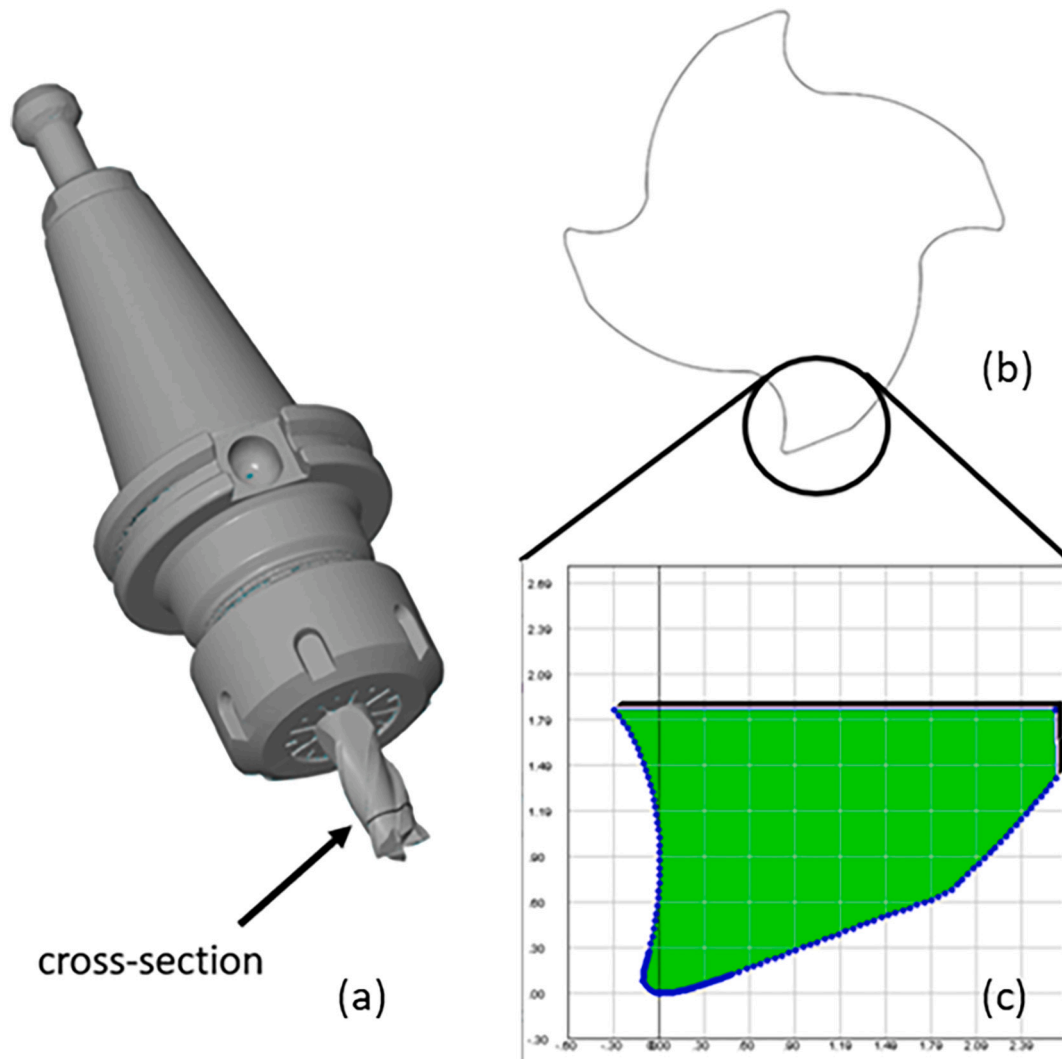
(a) Tool scan using GOM ATOS Q scanner. (b) Tool edge cross-section. (c) Tool cutting edge imported in AdvantEdge™.
